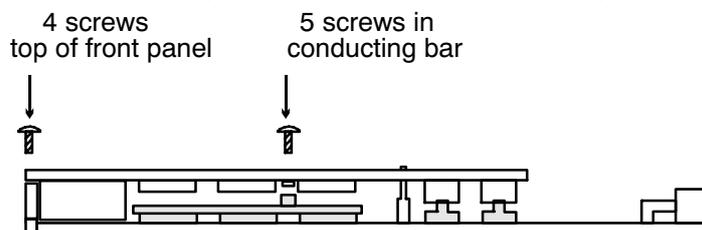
Installation of a XMC-ETH2 (RC) on a PENTXM2 (RC) Board (stage 3/4)
